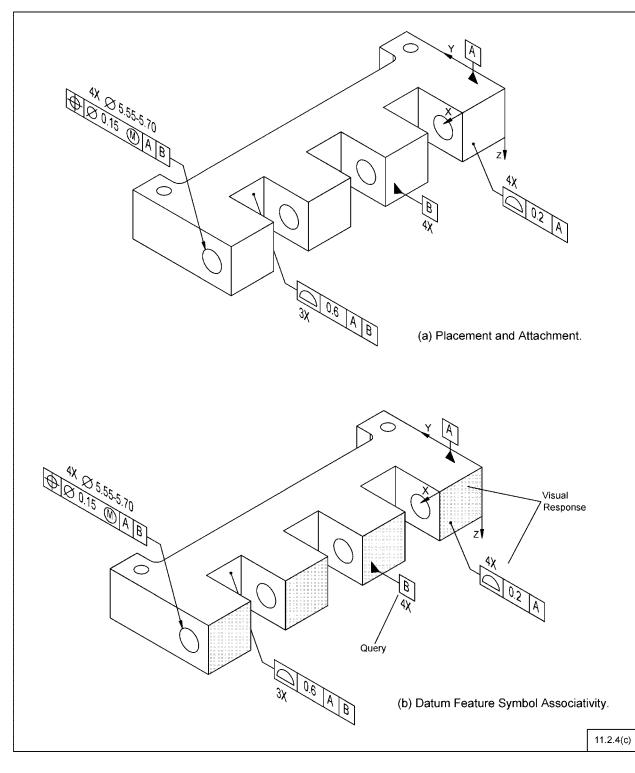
Coplanar Surfaces Establish a Datum Plane
